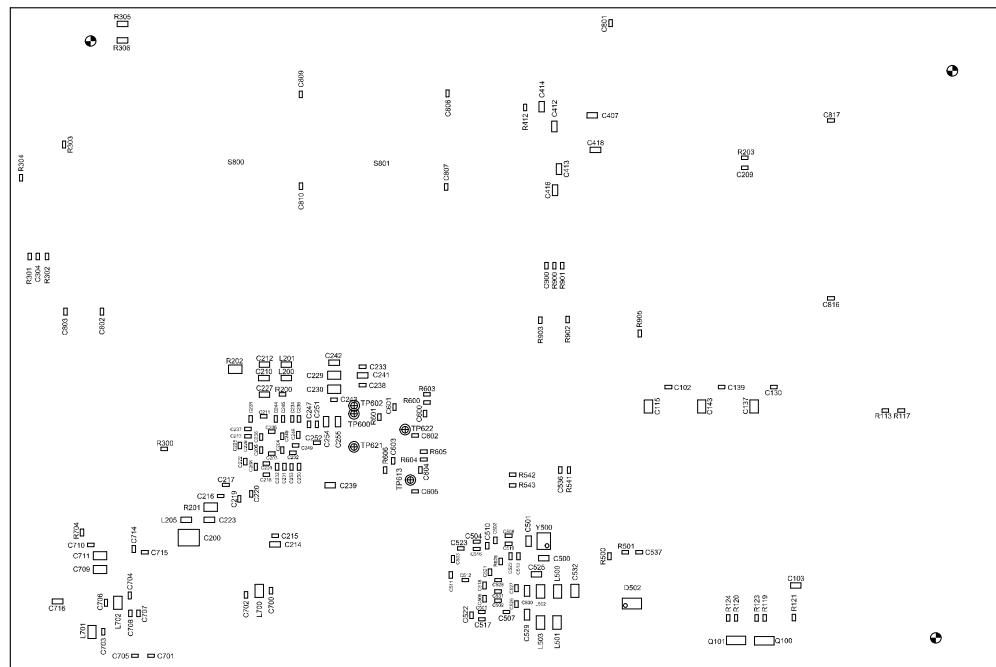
Secondary assembly drawing of TRAVEO™ T2G Cluster 4M Lite kit
